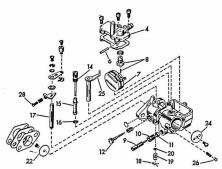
Exploded view of Tillotson carburetor typical of type used on Hummer and Super-10.
